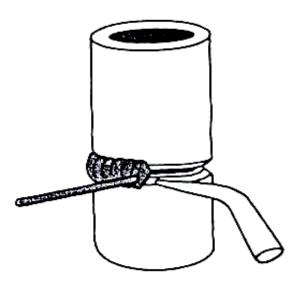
Backhand welding method used on pipe joint in the 2G position.
